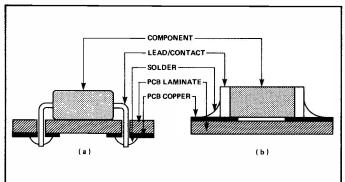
(a) Through hole construction. (b) Surface mounting.
